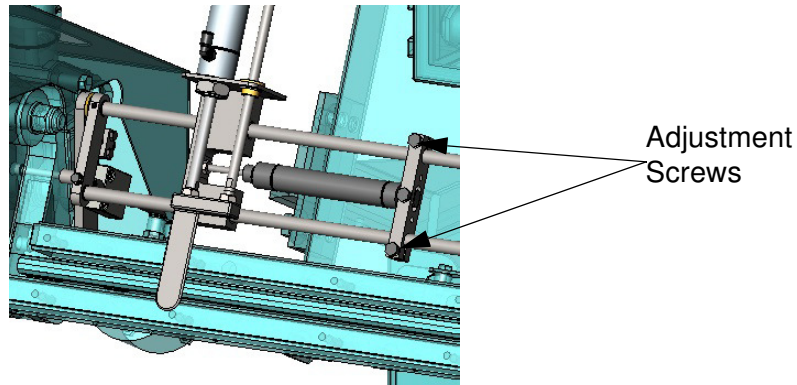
Adjusting the Left Hand Bag Stretcher
